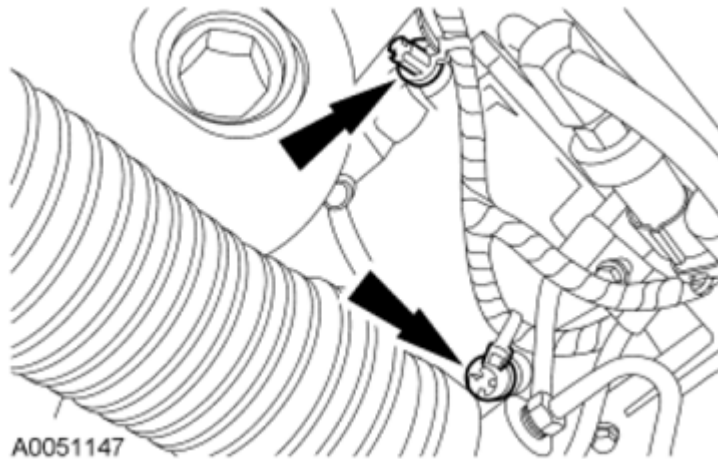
Locating Crankshaft Position (CKP) Sensor Electrical Connector
